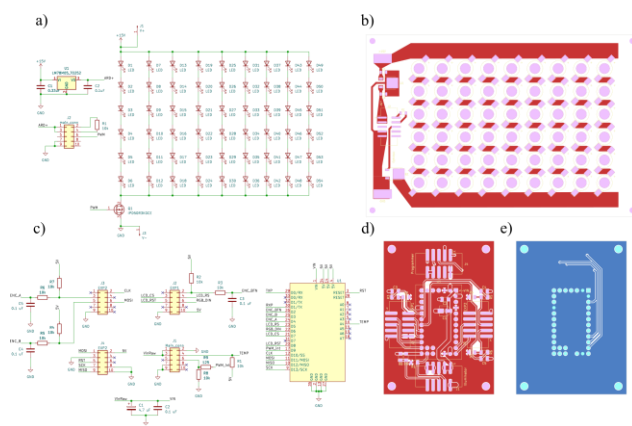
a) Principle electrical scheme of the LED array PCB. b) Layout of the LED array PCB. c) Principle electrical scheme of the main control board. d) and e) are layouts of the front and back layers of the main control board respectively.
